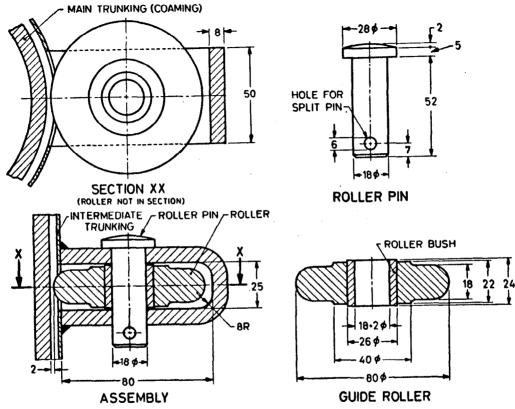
Nomenclature and Assembly of Type B Mechanical Turning Arrangement for Steel Cowl Ventilators
